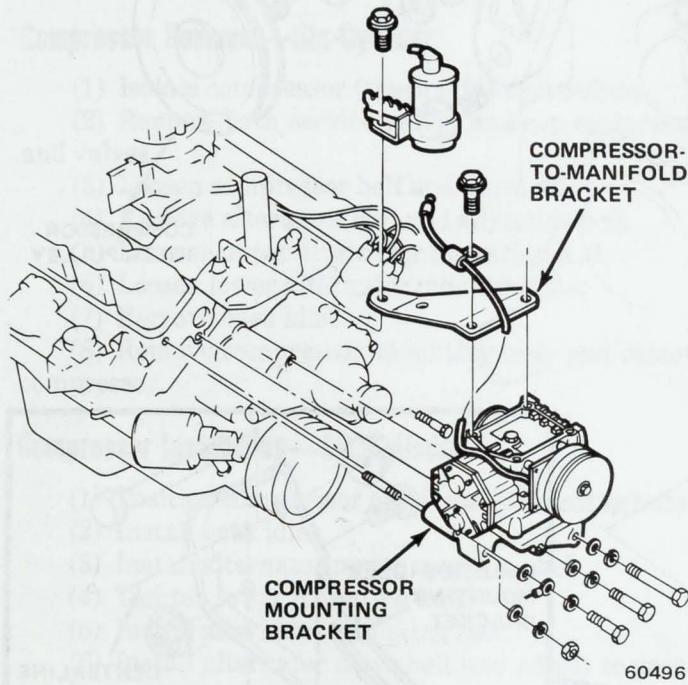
E-10 Compressor Mounting—Eight-Cylinder
